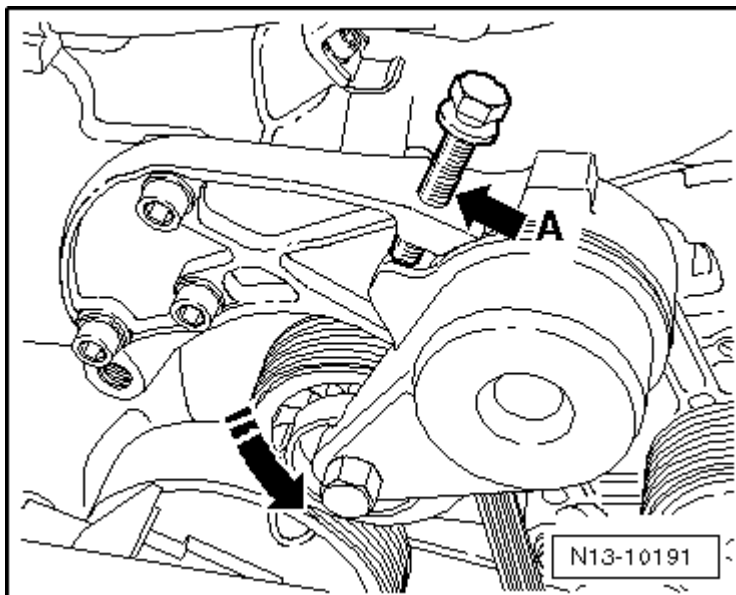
Identifying M8x50 Bolt In Threaded Hole
